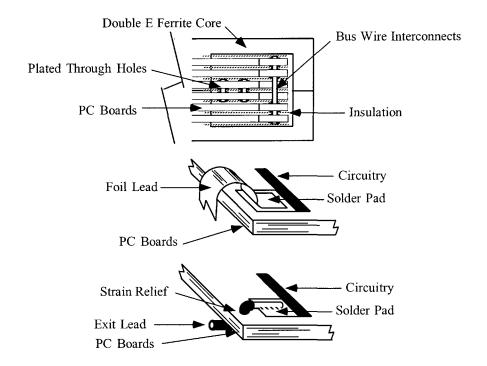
PC Winding Boards, Showing Interconnections and Exit Leads.
